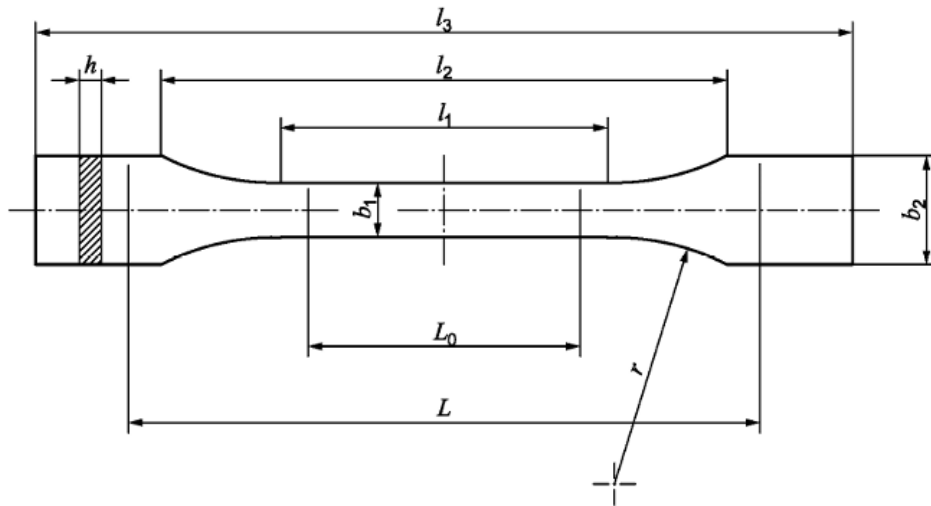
Technical drawing of ISO 527-1 Type 1A tensile specimen.
